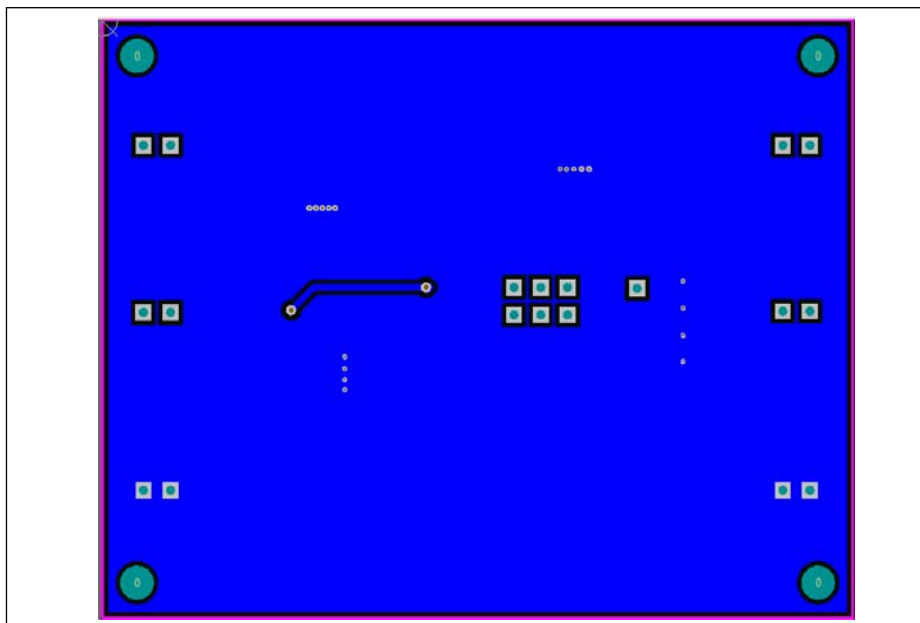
Board PCB Layout - Bottom Layer (SOT23-6)
